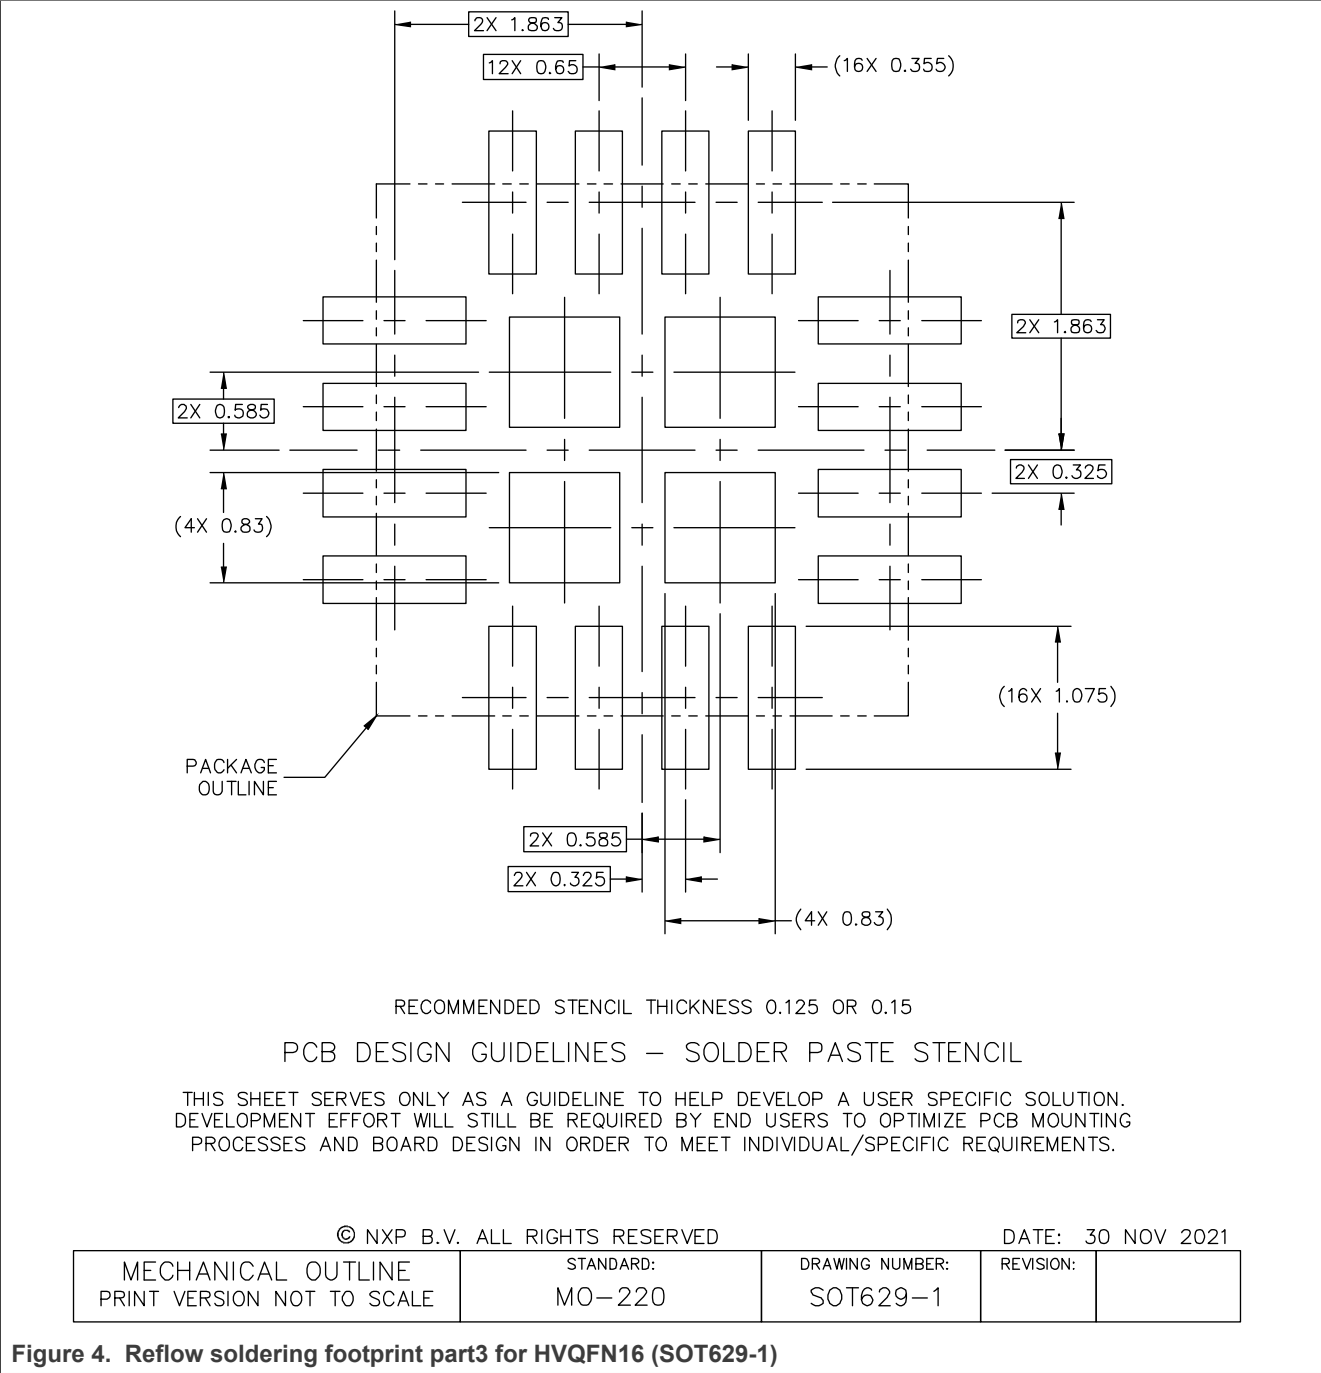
Reflow soldering footprint part3 for HVQFN16 (SOT629-1)
